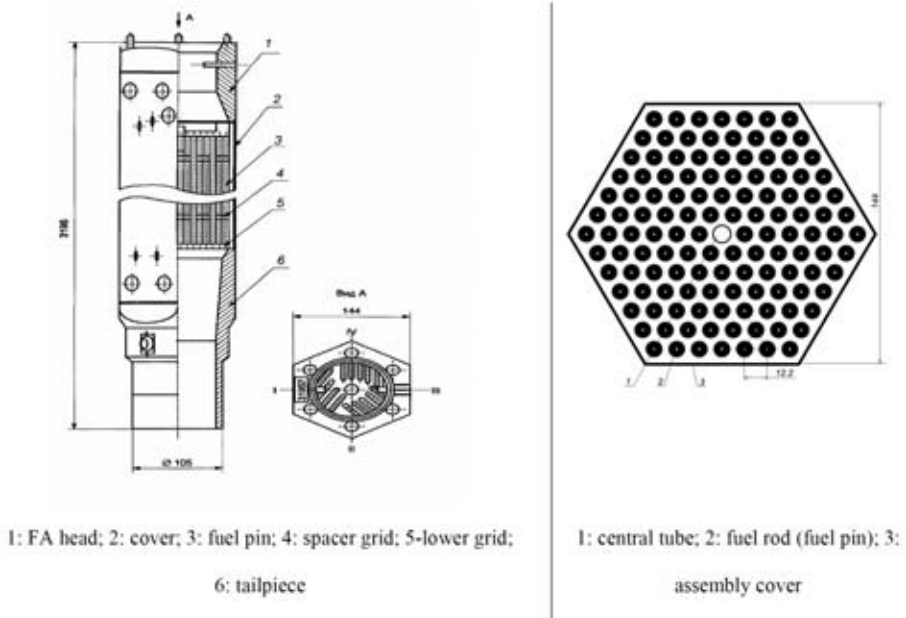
Scheme of the grid for fuel rods of the WWER-440 fuel assembly.
